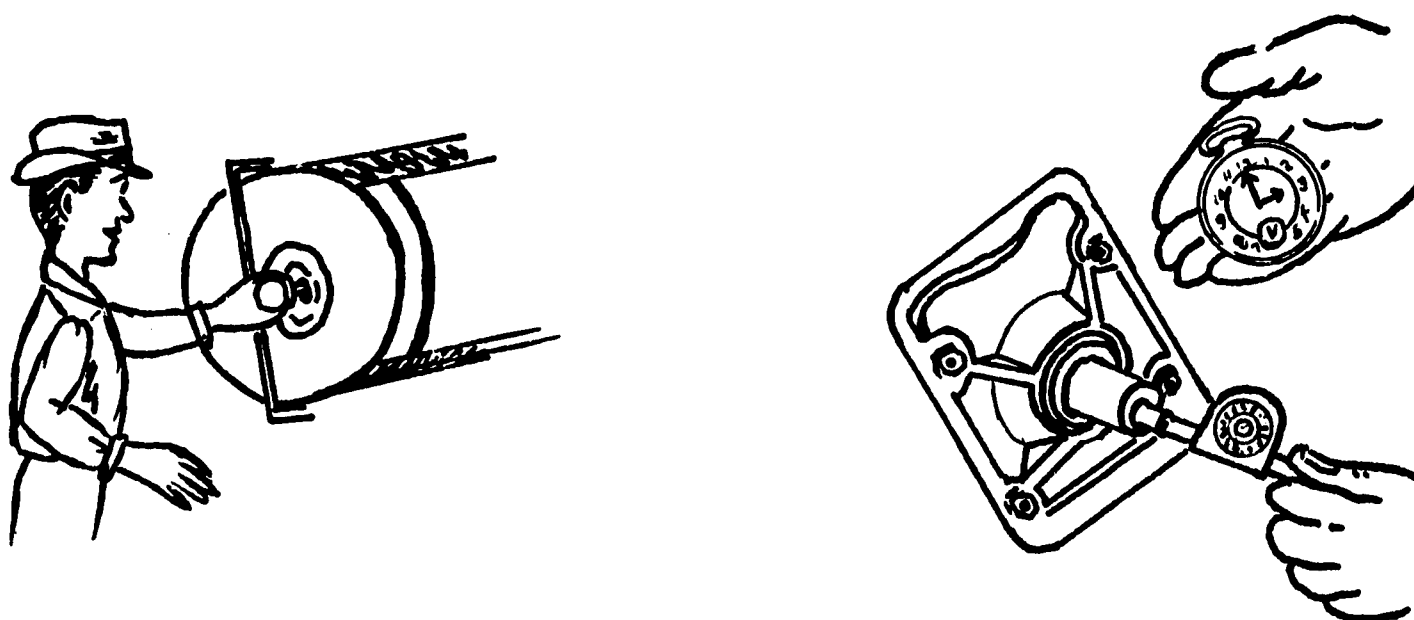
Check the machine speed by using a speed indicator on the "key" shaft.
